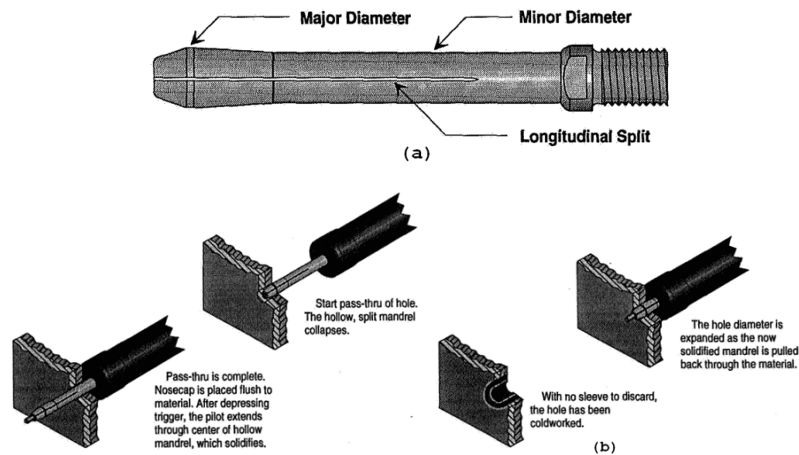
A schematic of the Side-view of mandrel in (a) and the schematic of Split Mandrel Expansion without sleeve in (b) [22].
